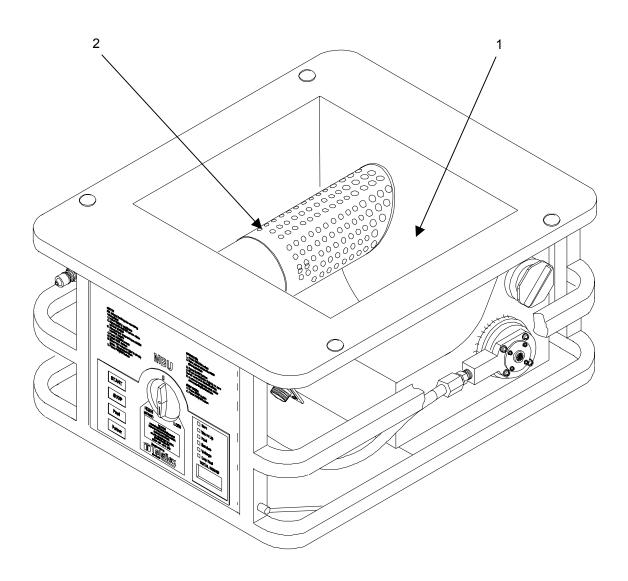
Inspect the Reflective Heat Shield and Burner Assembly
